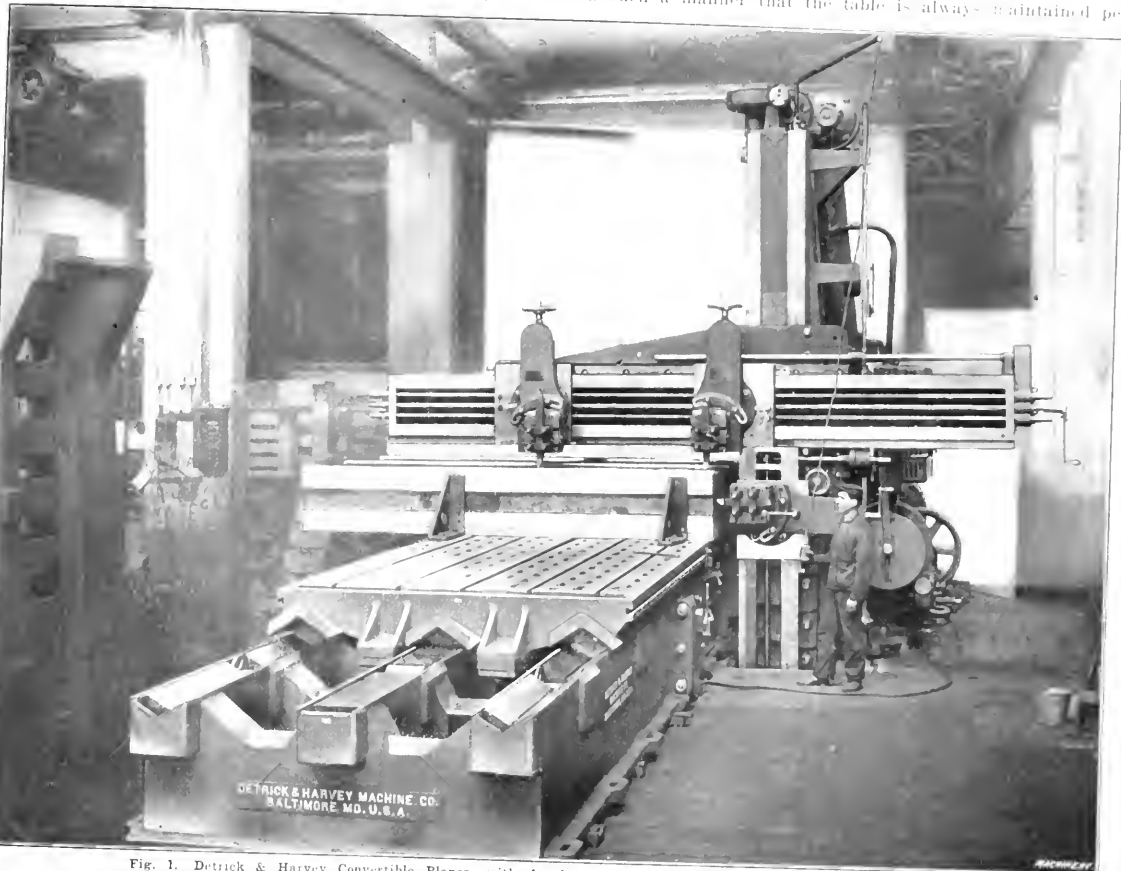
Detrick & Harvey Convertible Planer, with Auxiliary Housing removed for Use as an Open-side Planer
